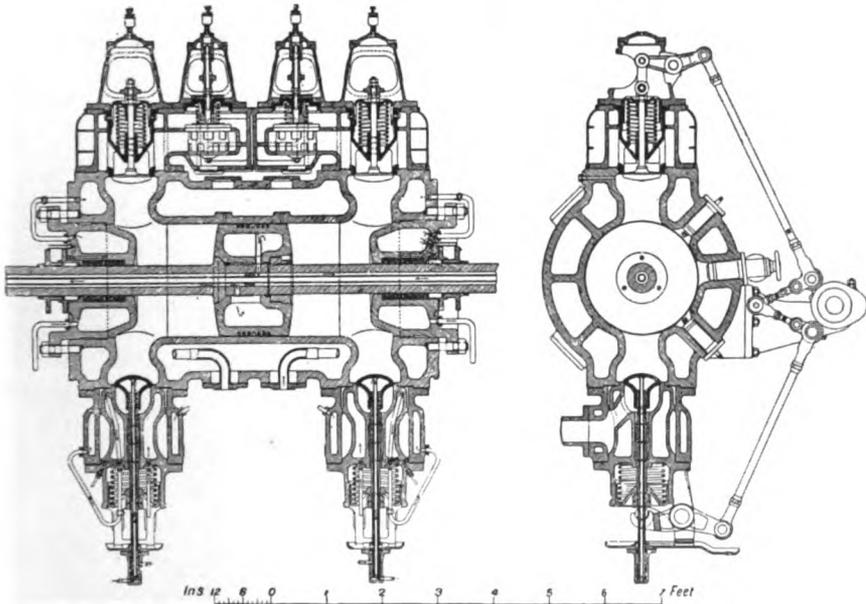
Ehrhardt & Sehmer, 700 H.P. Engine.
